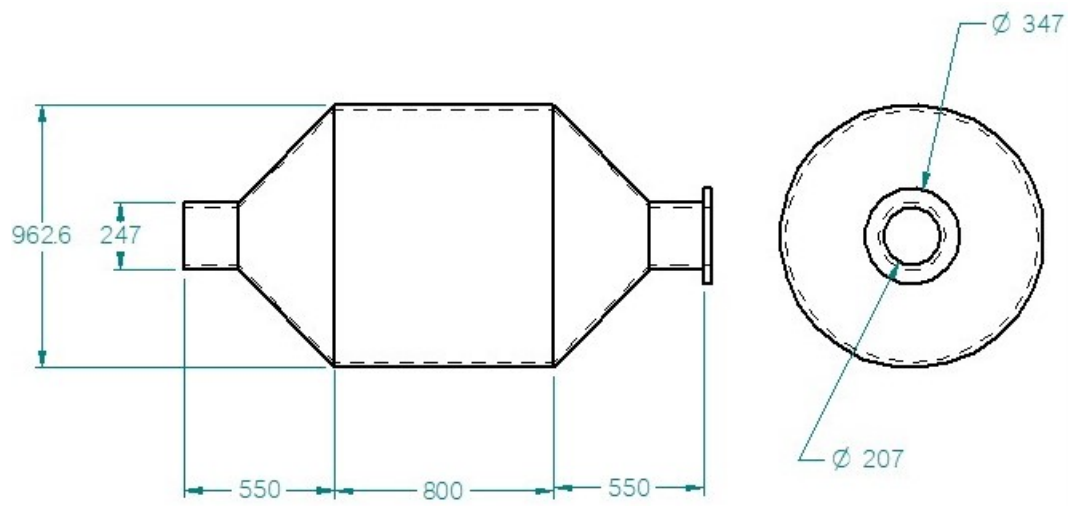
Two dimensional view of rotary drum ball mill grinding shell
